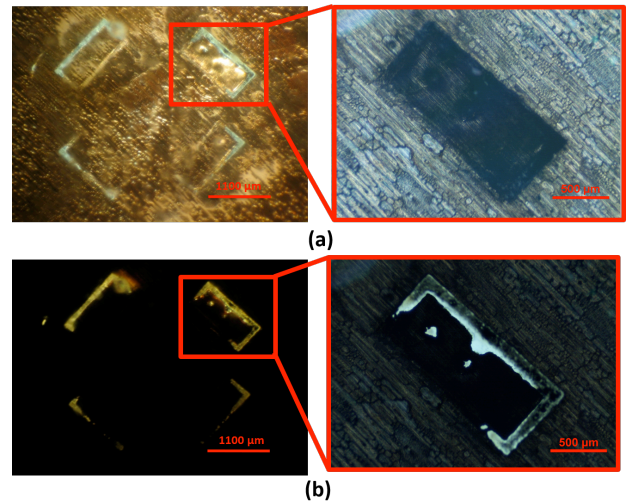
A sample patterning result obtained with the modified M^3 EDM process (using the electrodes with a rectangle pattern shown in Figure 4): (a) Backside of the machined area with front illumination (left) and a close-up view (right), and (b) backside of the same machined area with background illumination (left) and a close-up view (right).
